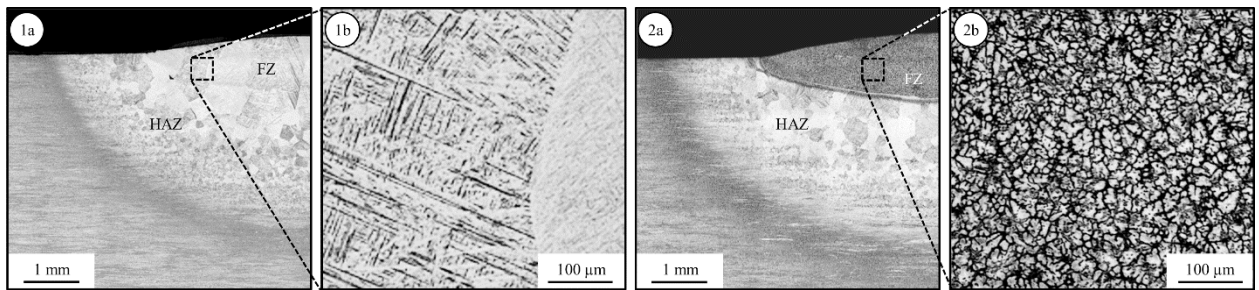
Macro- (1a) and micrograph (1b) of a bead on plate weldment in cross sectional view, TIG welded without SiC addition. Macro- (2a) and micrograph (2b) of a bead on plate weldment in cross sectional view TIG welded with SiC addition, 3.3 wt-% Si.
